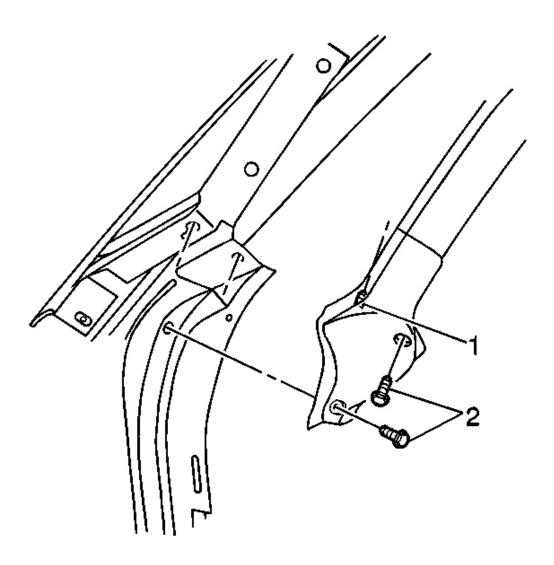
View Of Weather-Strip Retainers Courtesy of GENERAL MOTORS CORP.
